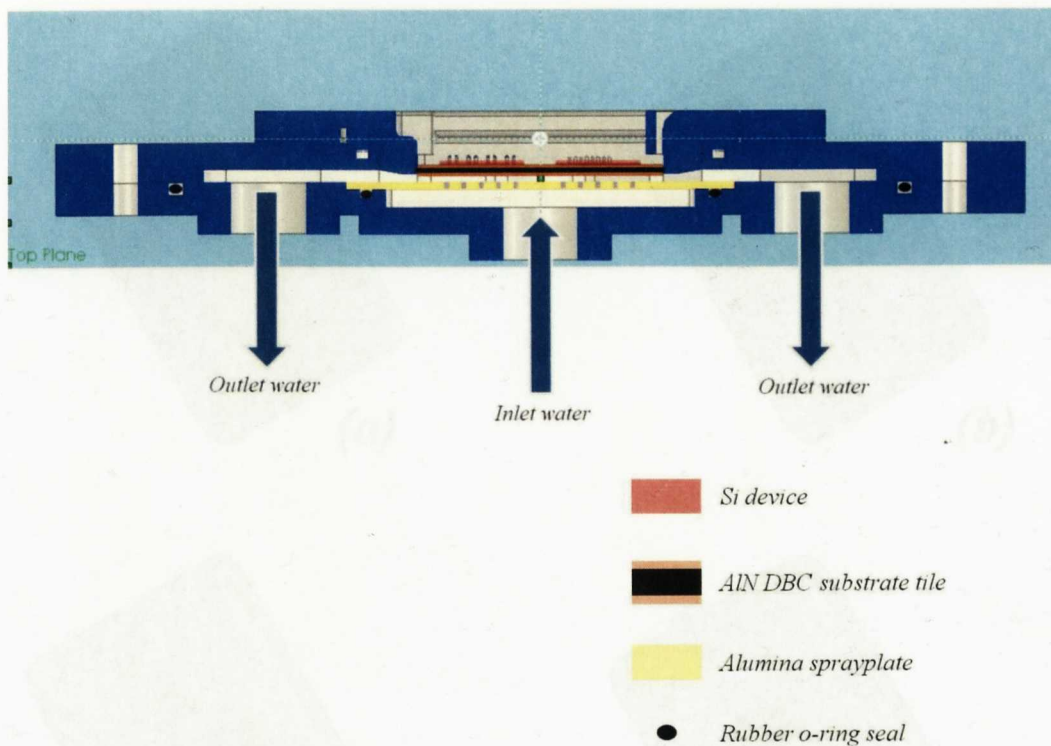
A cross-section of the CAD drawing of the impingement cooler.
